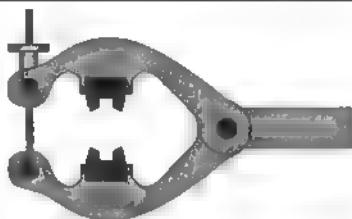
An external hone suitable for finishing a piston or uncut piston ring.
